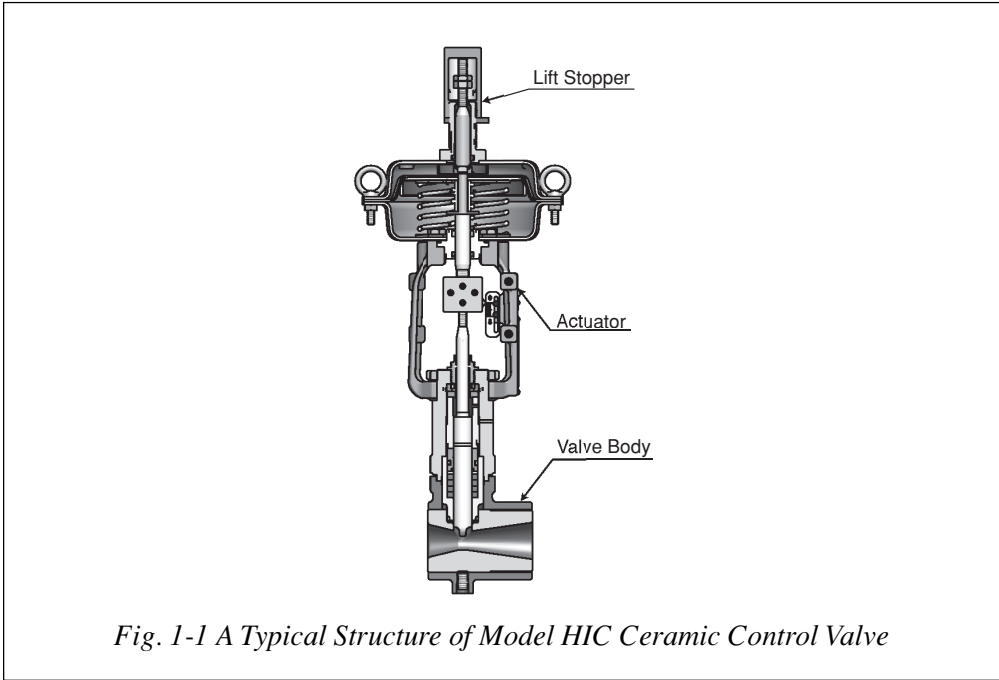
A Typical Structure of Model HIC Ceramic Control Valve
